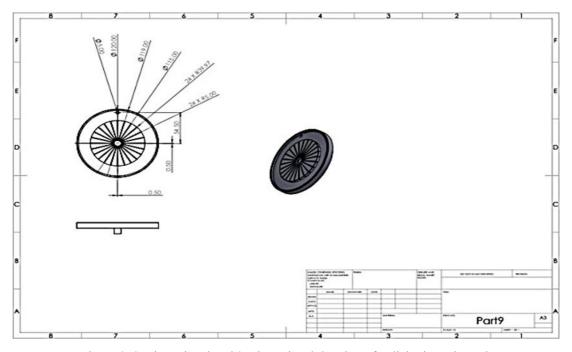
2-Dimentional and 3-Dimentional drawing of radial micro channel.
